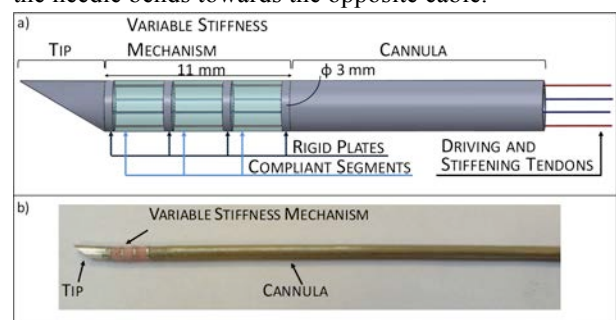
a) Overall sketch of the needle, b) final prototype.
